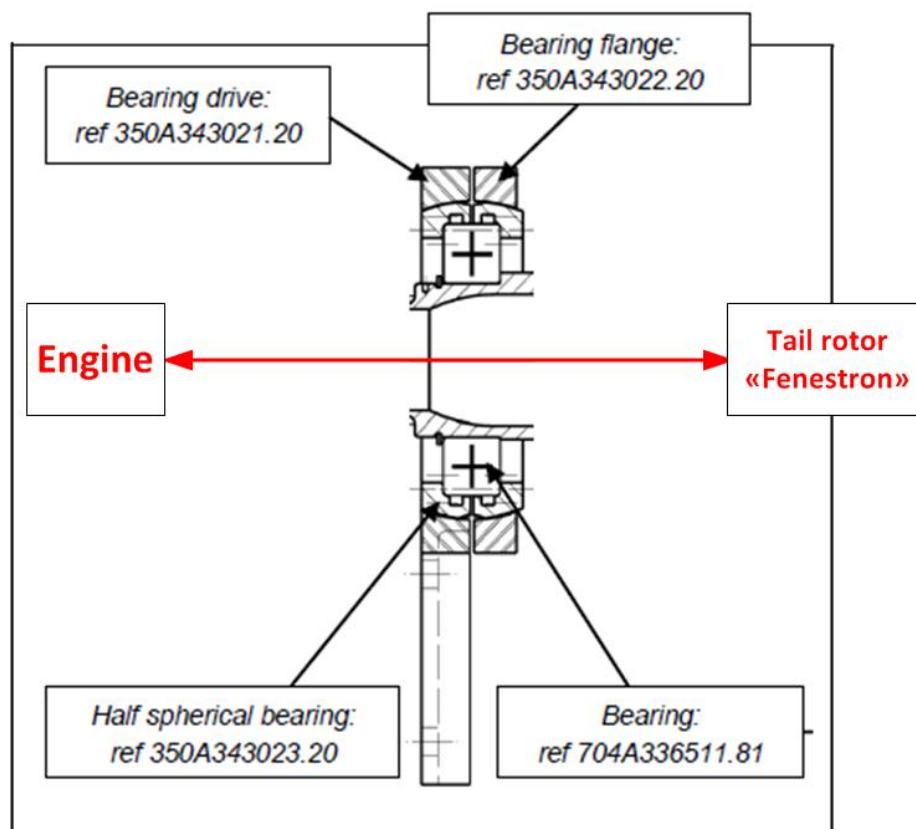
Bearing no. 1 layout. Source: Airbus Helicopters/processed by AIBN
